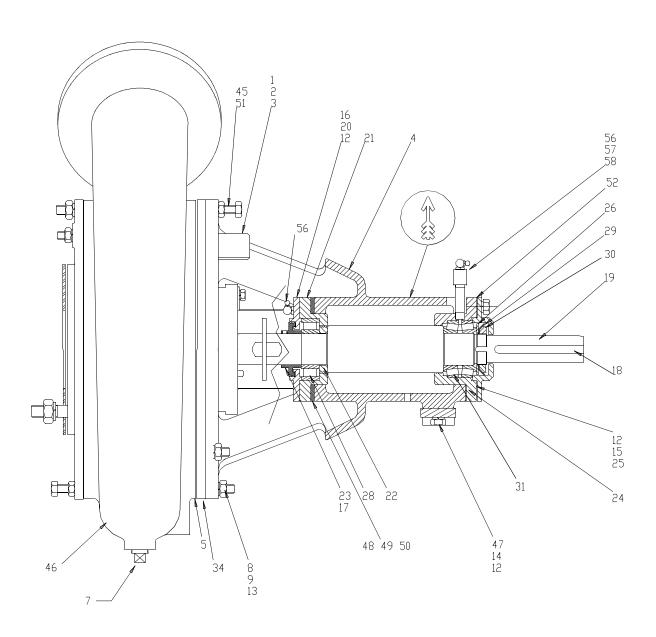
Bearing/Shaft Assembly - GP150M & GP200
